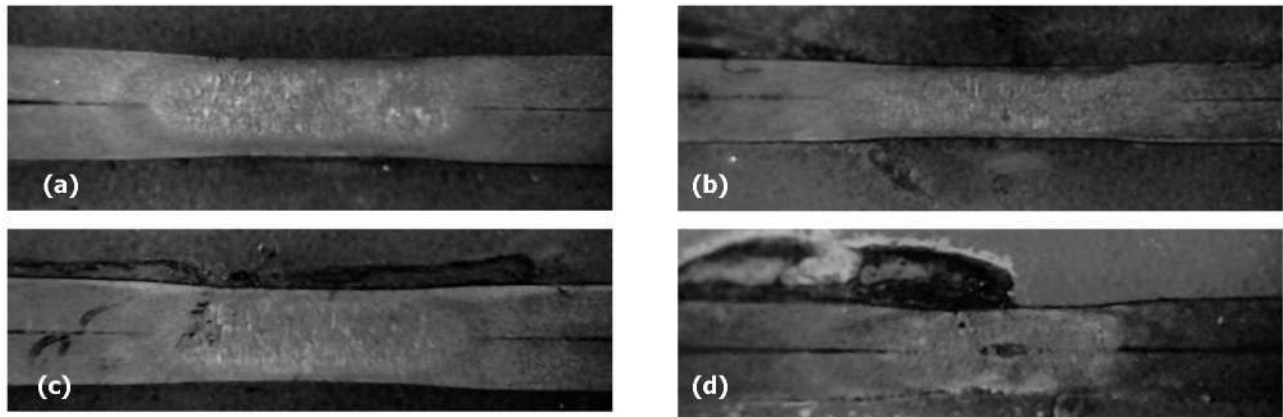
Macrostructure of nuggets under varying welding time (T) at a constant weld current of 2.5 kA
